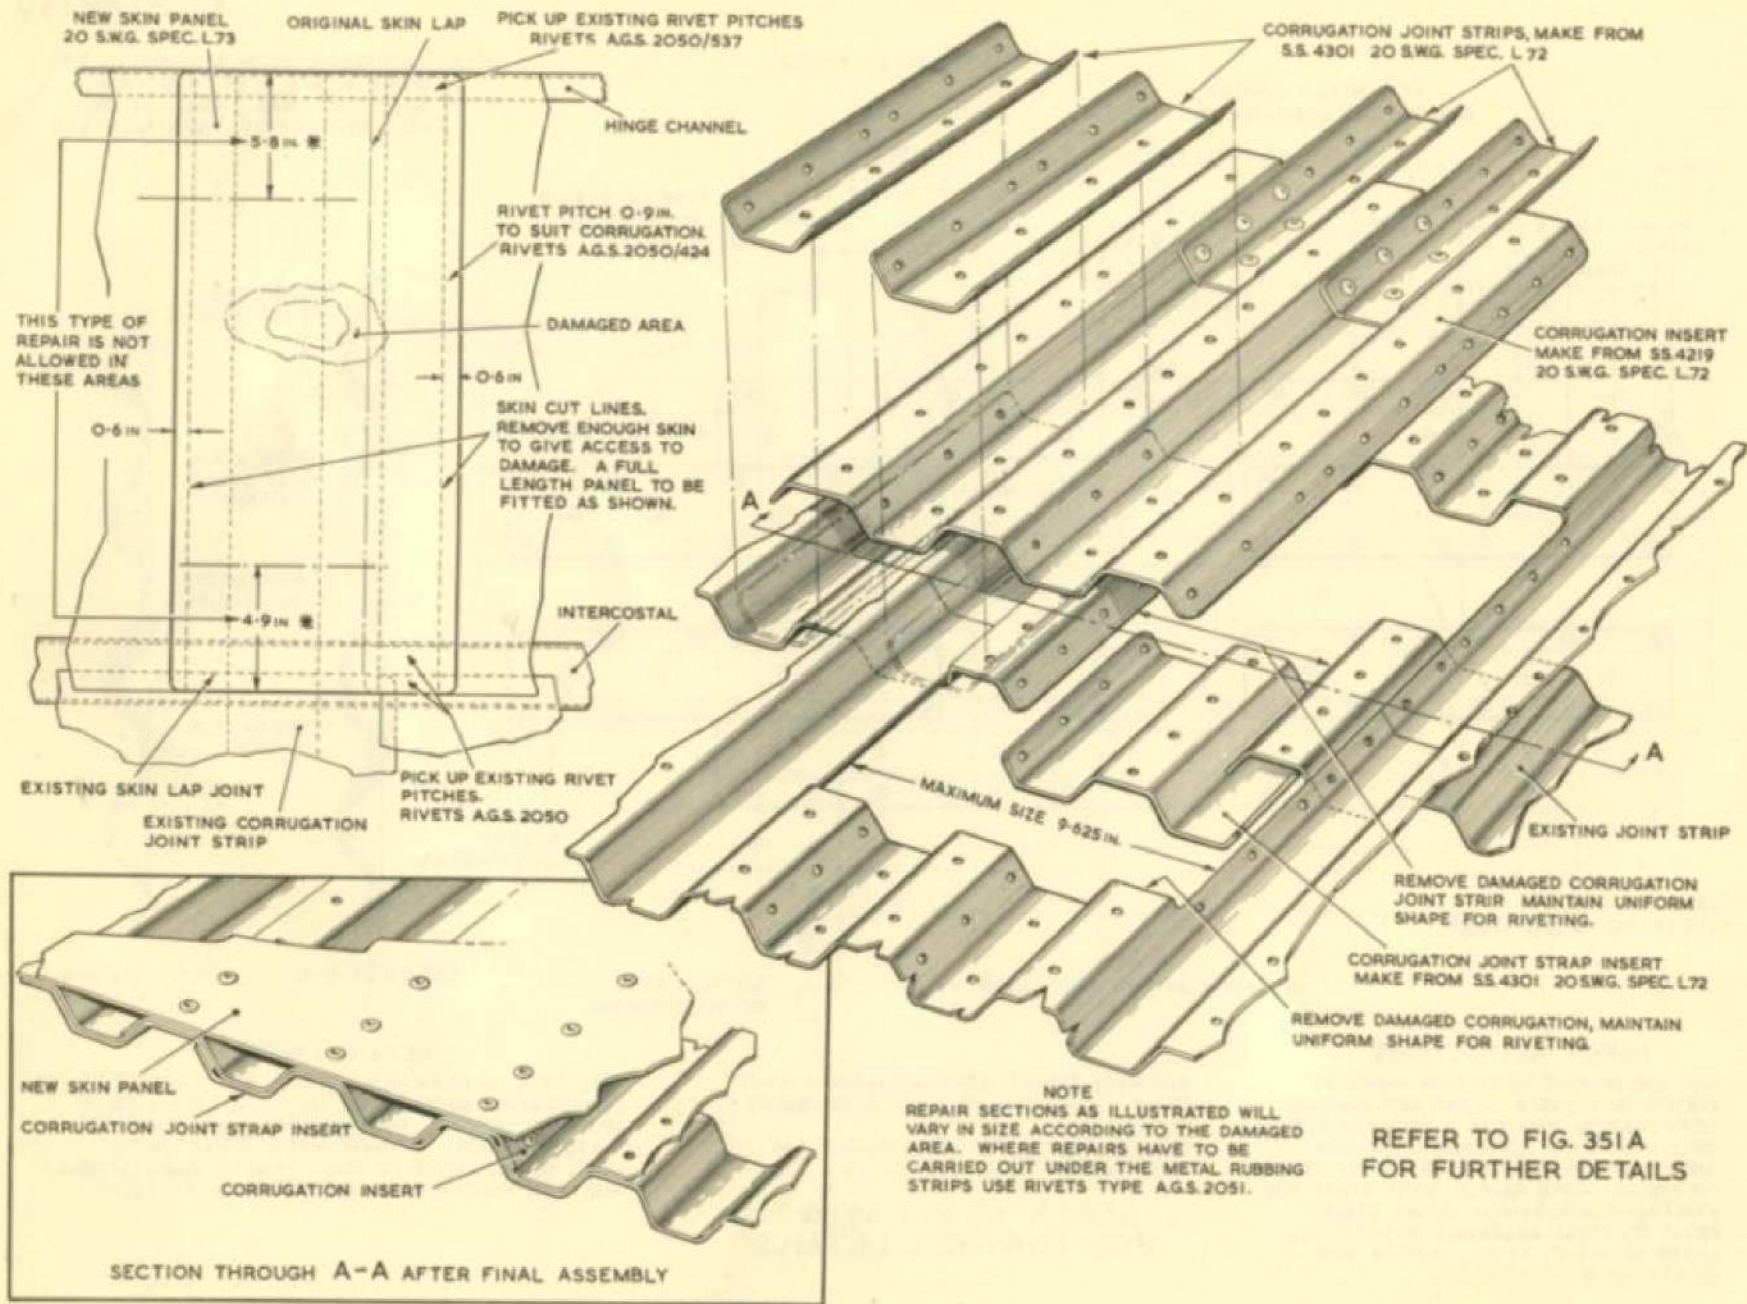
B BOMB DOOR REPAIR CORRUGATION JOINT AND SINGLE SKIN
